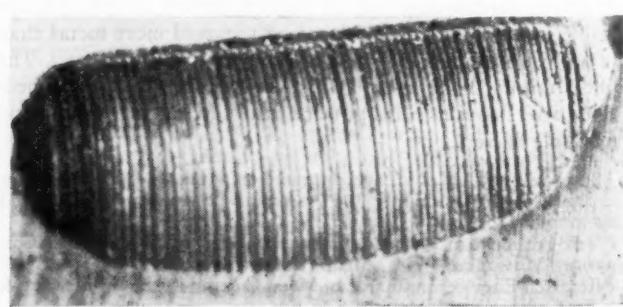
CUTTING TIP AT END OF TEST AT 3280 FPM
